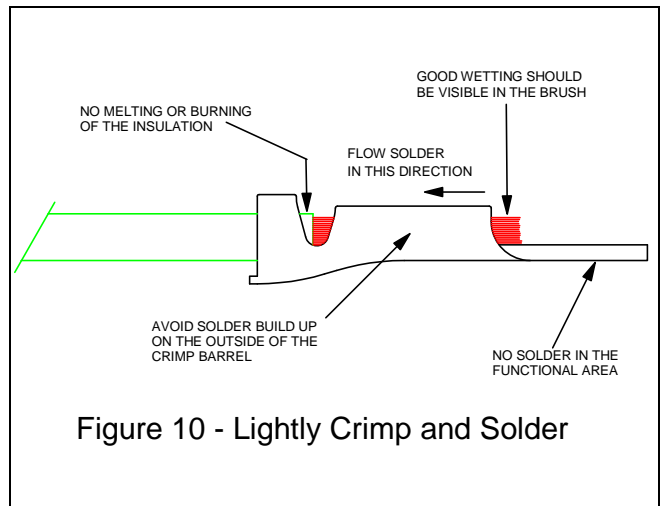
Crimp Light and Solder Criteria per EC G42804 [1]
